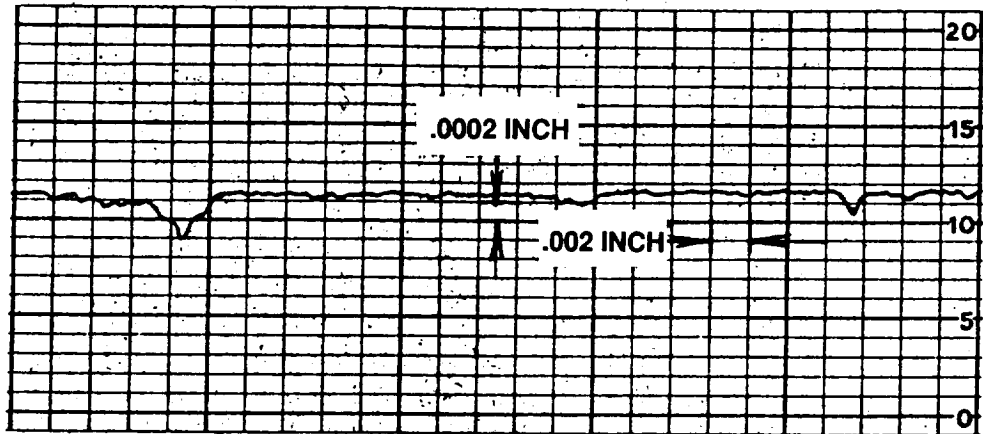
Profile of Turbine Bearing Journal Surface Along Shaft Axis
